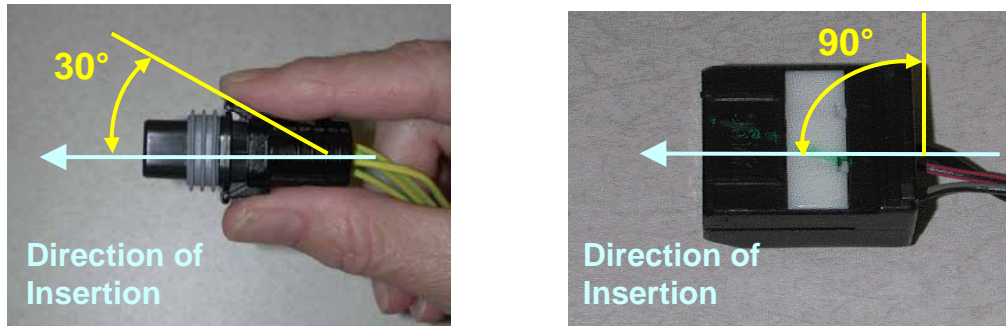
CONTACT SURFACE AREA AND EDGE RADIUS
